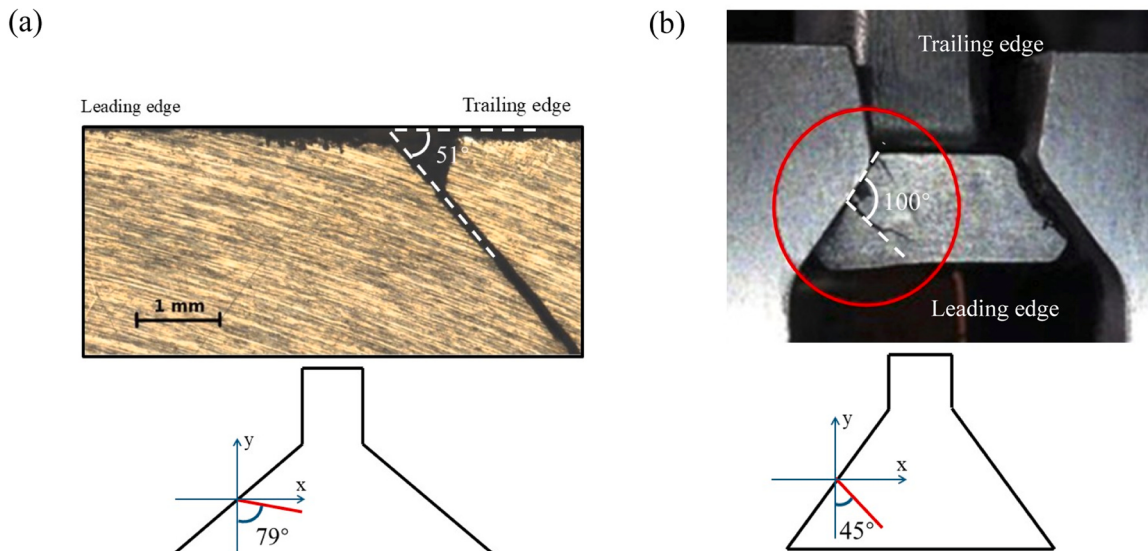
Crack initiation angle of two different dovetail joints: (a) WP-T14 of dovetail joint with pads [14] and (b) T-T3 of traditional dovetail joint [19].
